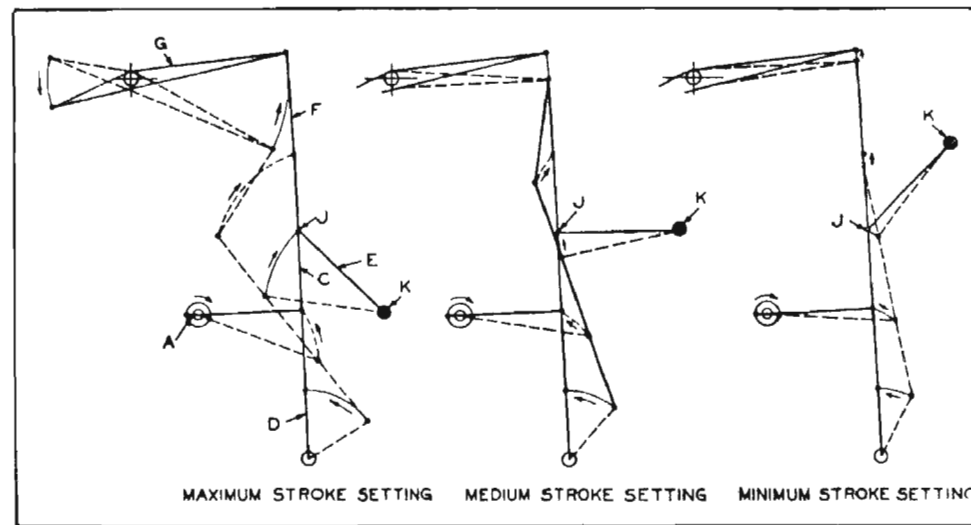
Method of Adjusting Mechanism Shown in Fig. 8 for Different Length Strokes.
